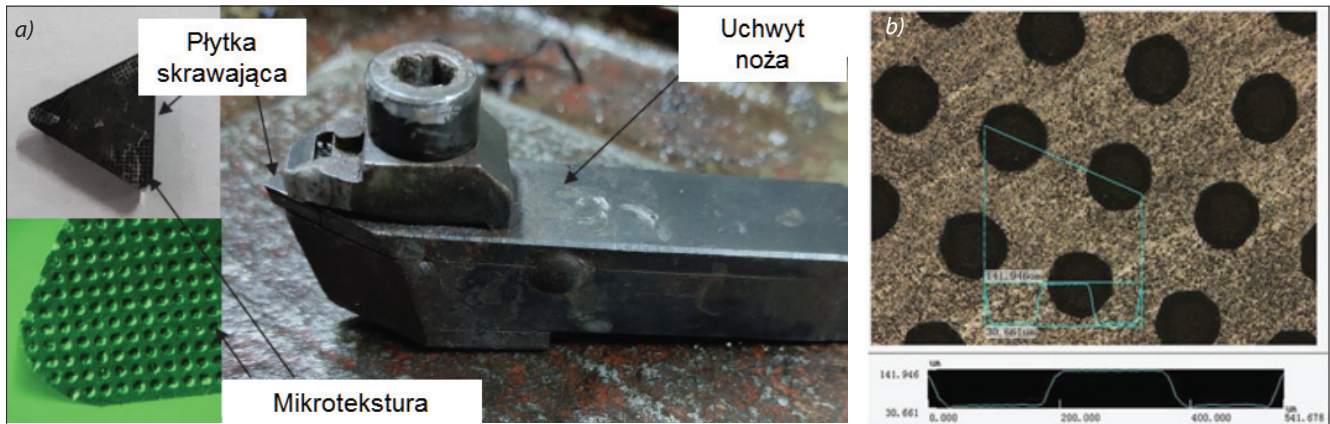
Example of micro-structure fabricated on the rake face of CBN cutting inserts using laser ablation process: a) view of texture on the corner, b) magnified grooves [12]
